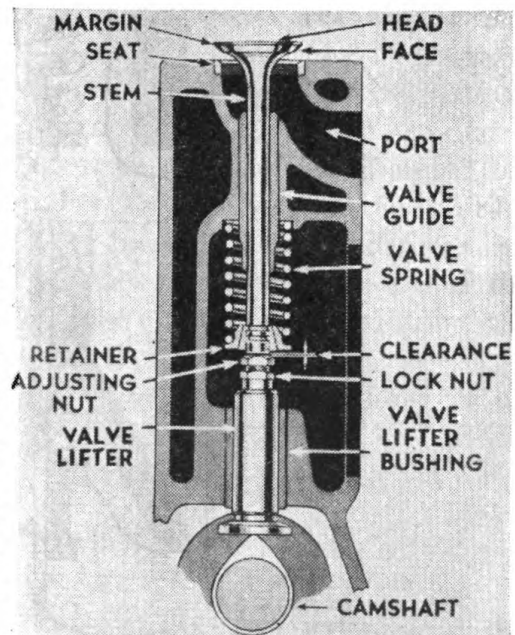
Poppet-type valve and related parts used in L-head engine.
